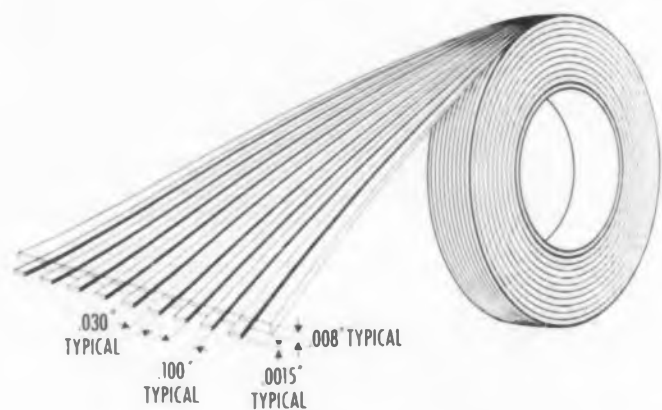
Flat cable has thin, flat, parallel conductors embedded in tough, thin insulation. Shown are the dimensions of a cable made by the Tape Cable Corp.
